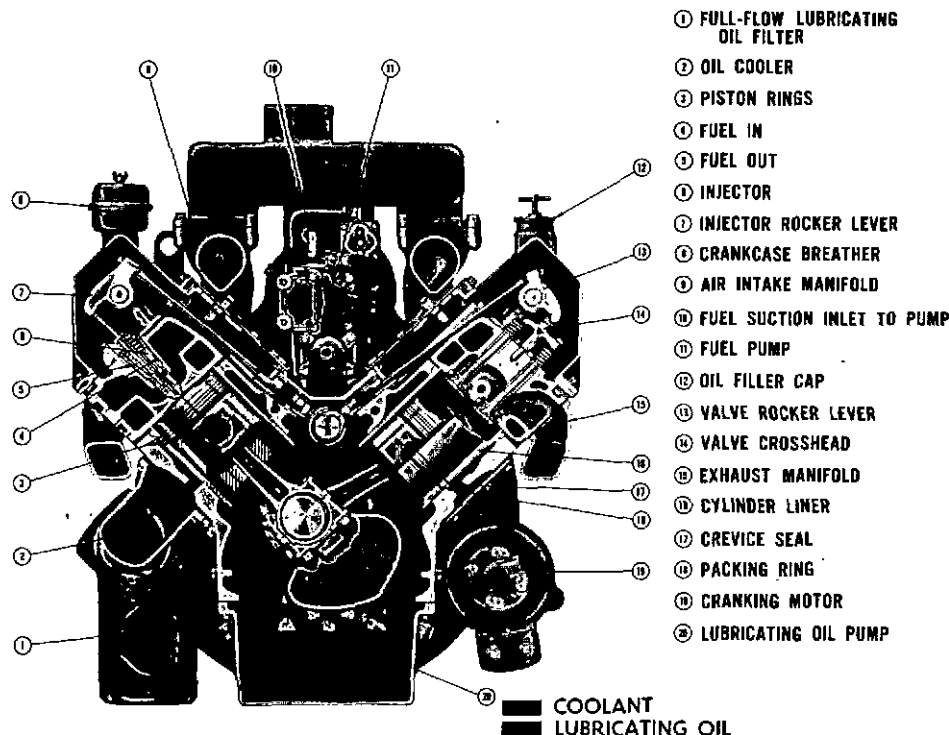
, LWC-4. Lubricating oil and coolant flow
